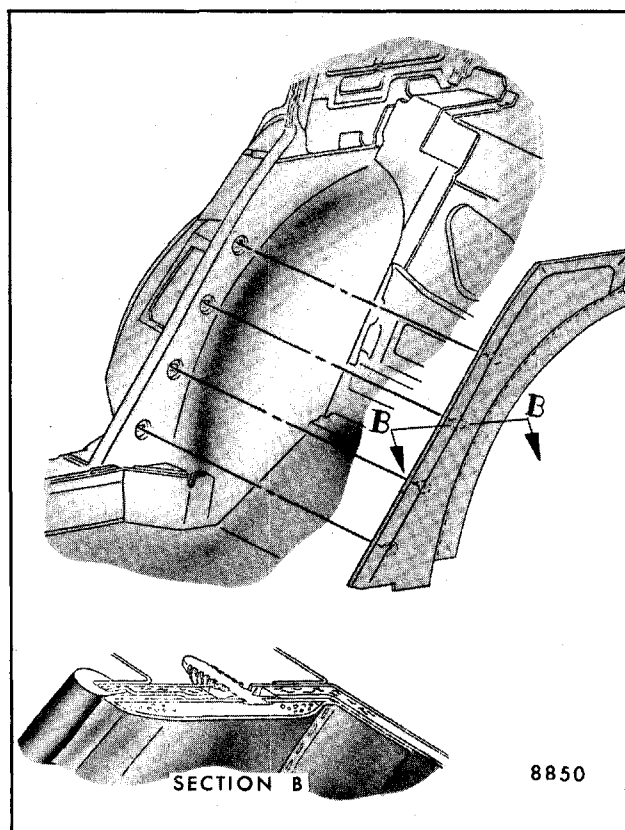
Quarter Lower Trim Attachment - "K-69" Styles
